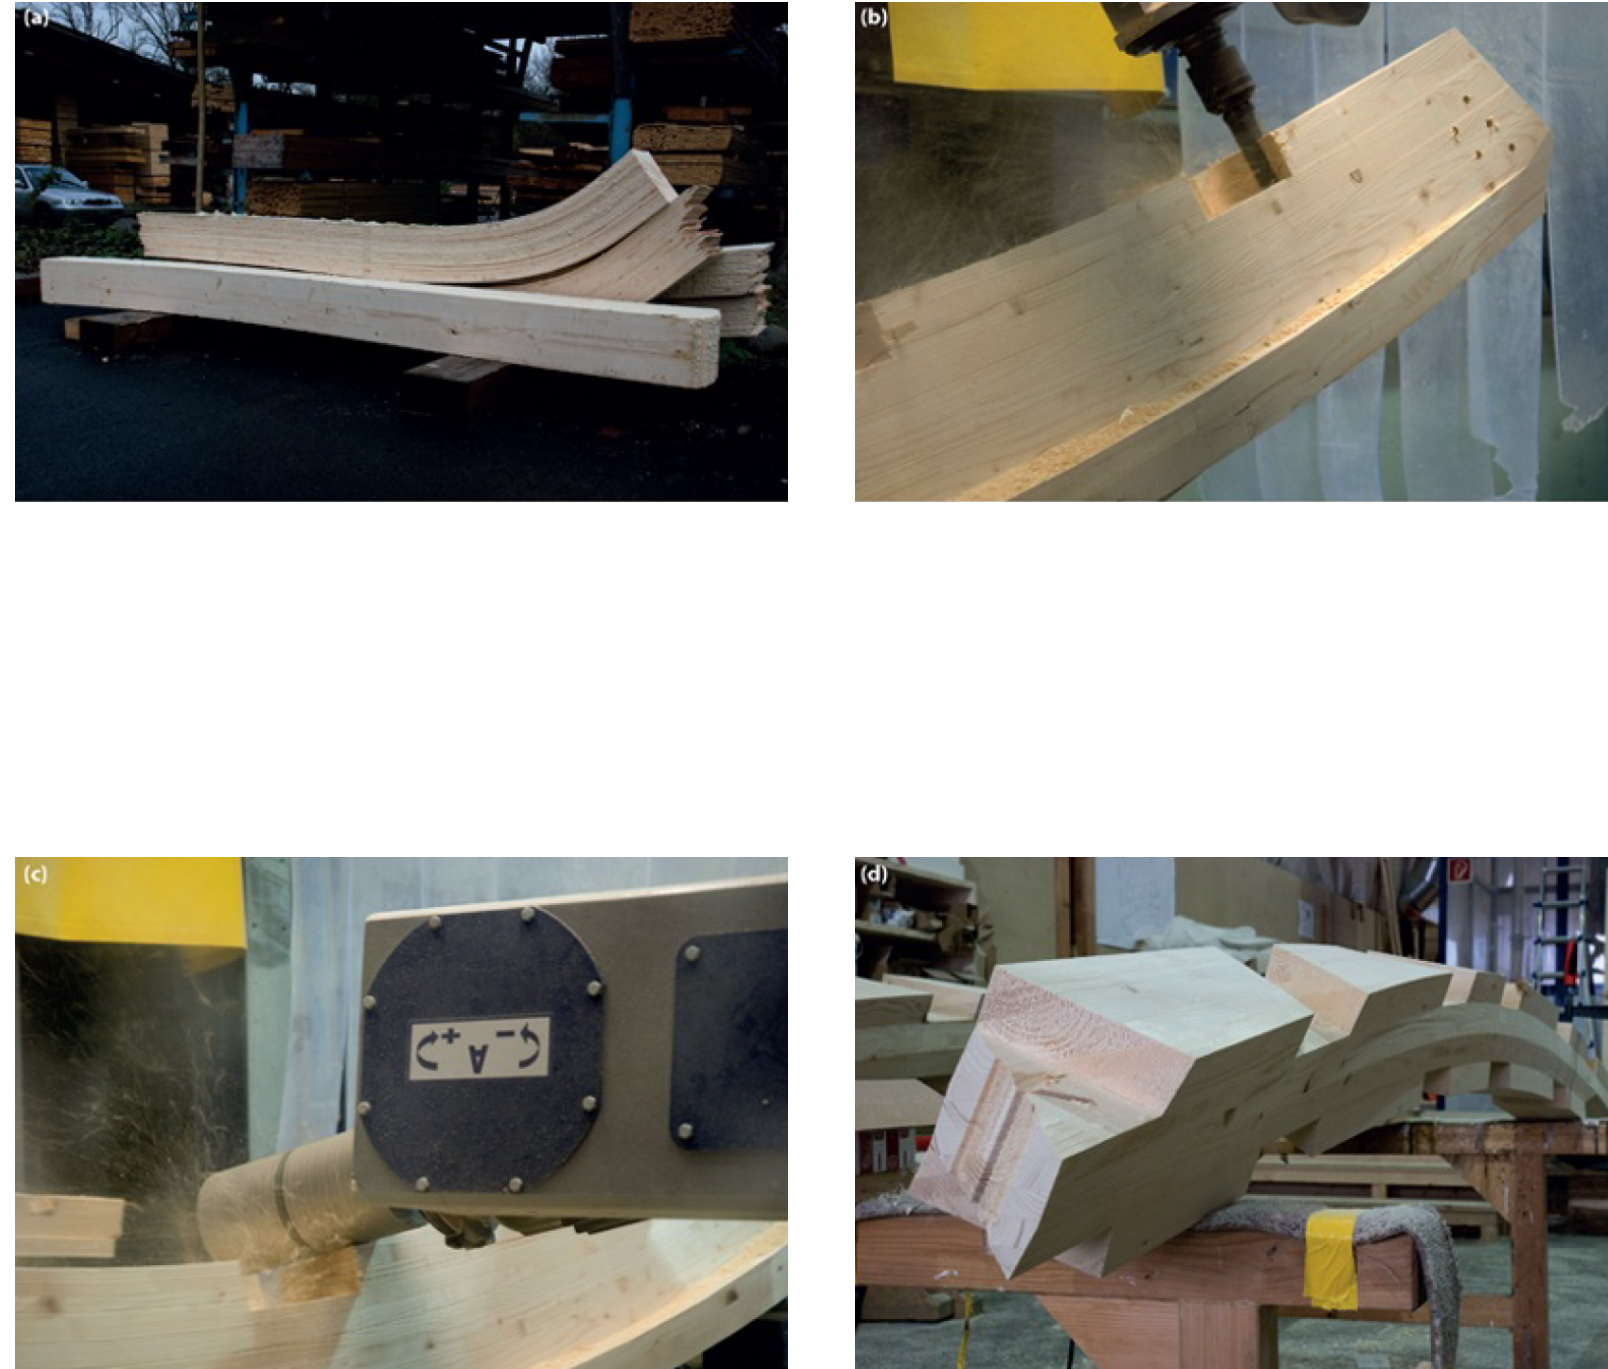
(a) Glue-laminated timber blanks being (b) cut and (c) milled to form (d) complex CNC-machined components. Source: designtoproduction GmbH
